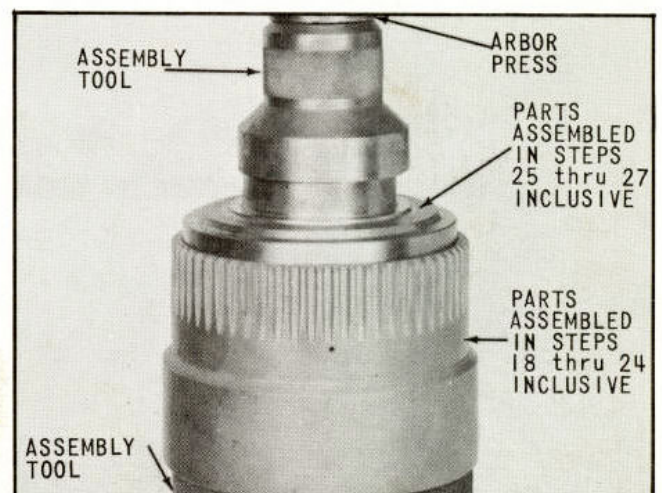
Pressing Forward Clutch Hub into Ring Gear
